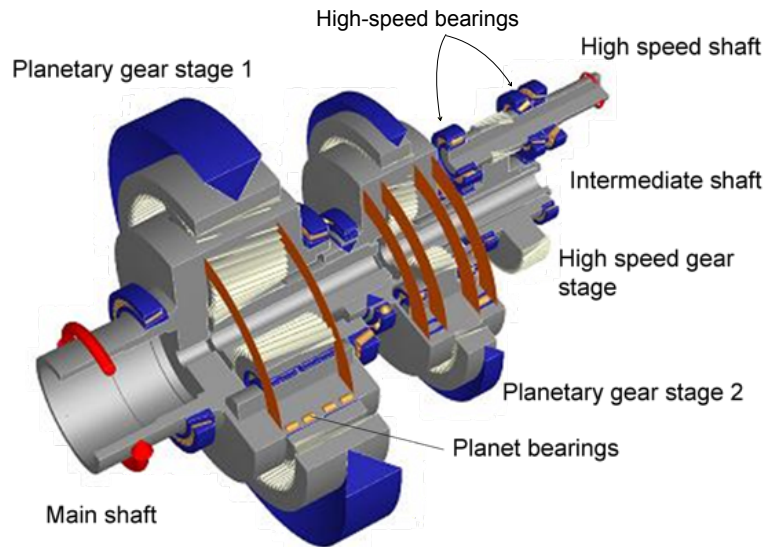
Layout of a typical wind turbine gearbox (modelled in RomaxWIND^[3])
